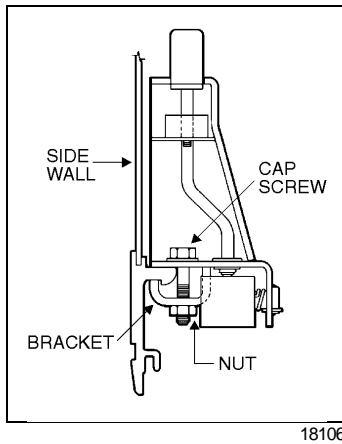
PASSENGER SEAT FRAME HOLDING
